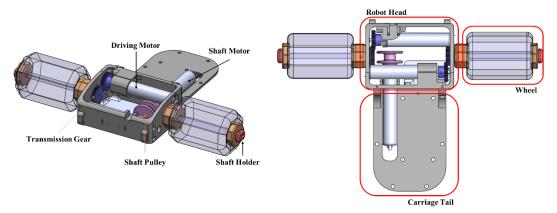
Overall view of the wheel deformation and torque transmission mechanisms.
